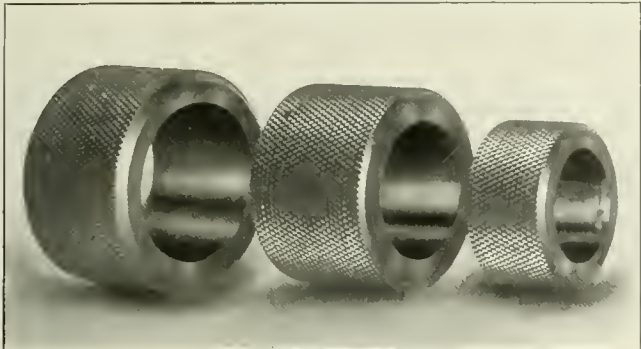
Knurled Nut Blanks made at a Rapid Rate on the Cleveland Automatic Screw Machine
